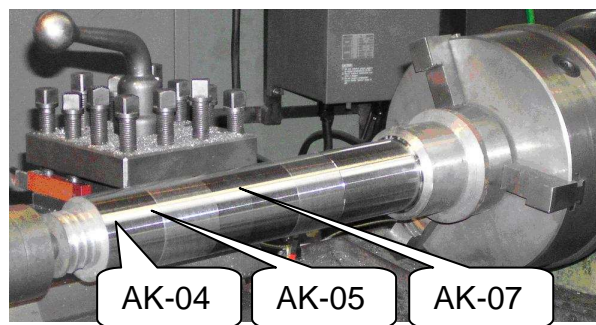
View on the specimen machined by the tool with the different cutting edge state
